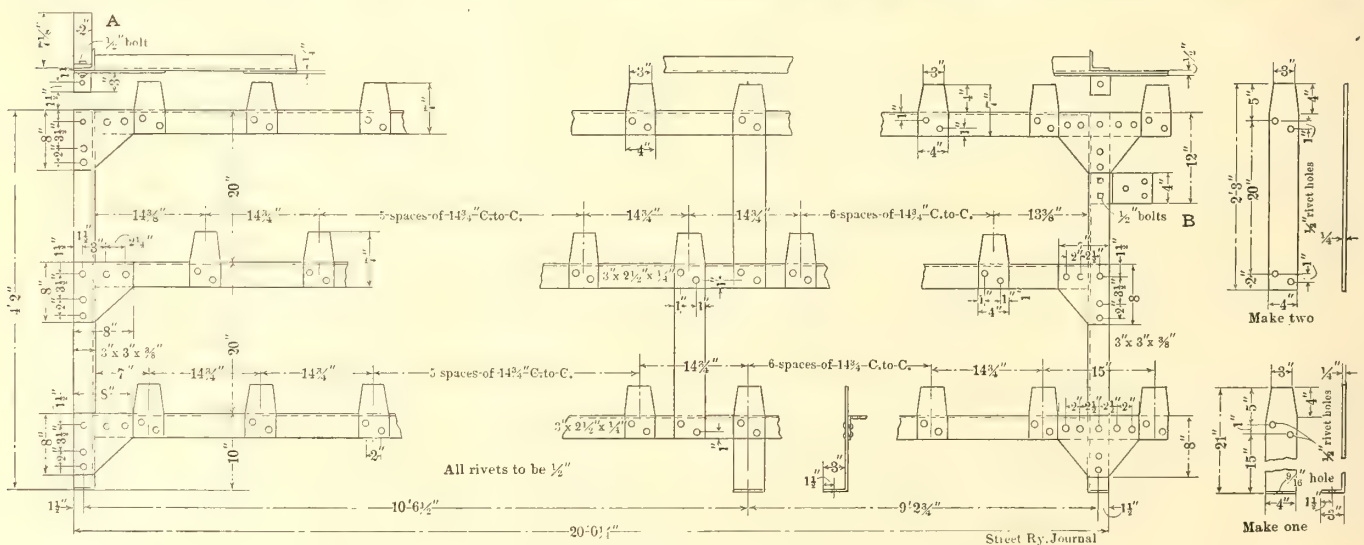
CONSTRUCTION DETAILS OF HEADLIGHT RACK
